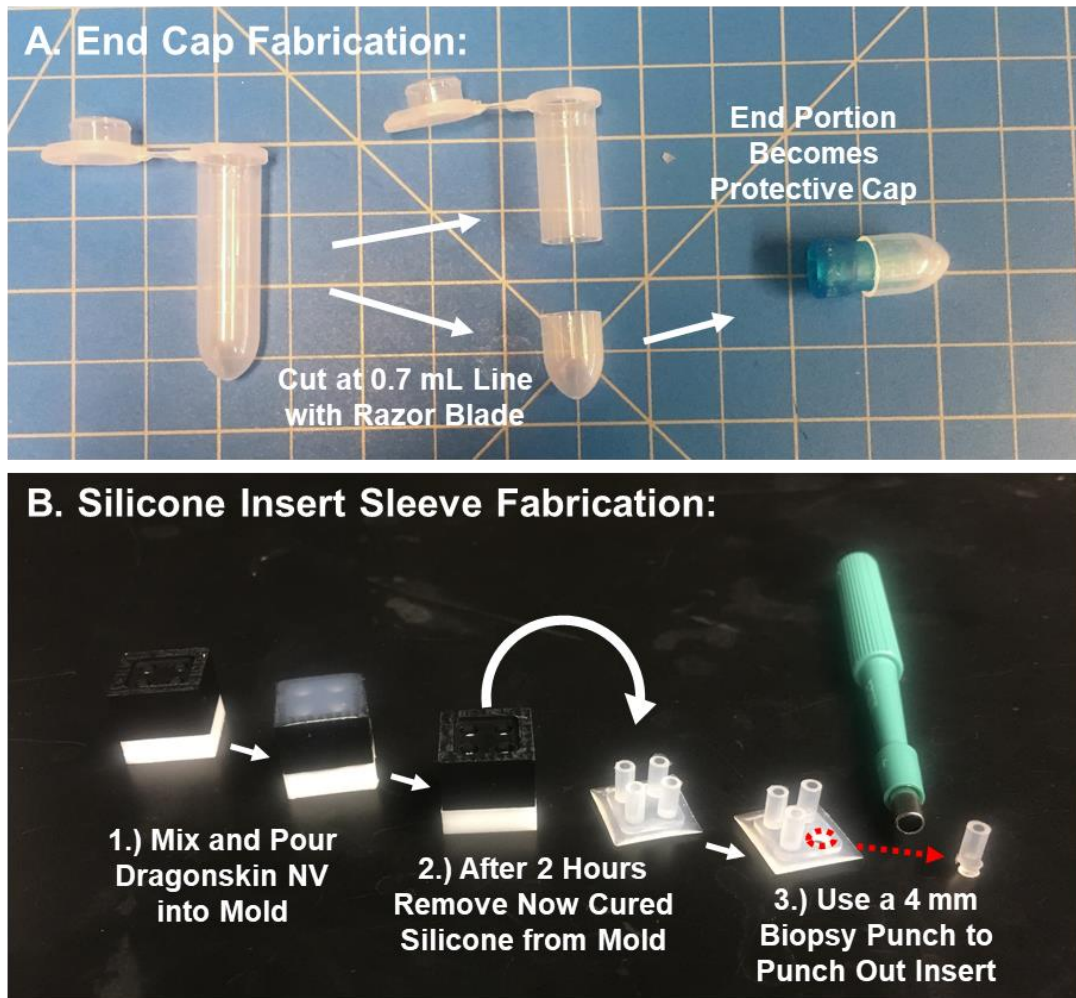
Protective Cap and Soft Silicone Insert Fabrication. A. End Cap Fabrication Process Diagram. A razor blade is used to cut the end portion of the micro-centrifuge tube to be used as the cap. B. Silicone Insert Sleeve Fabrication Process Diagram. The two part dragonskin silicone polymer is mixed then poured into the molds. These molds are degassed for 10 minutes to remove bubbles then placed for 2 hours to cure. After curing, the now solid polymer can be removed from the mold and each individual insert can be punched out for use.
